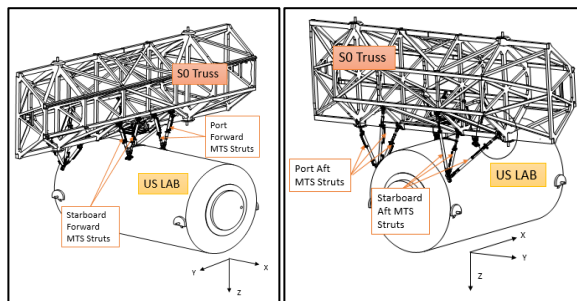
Schematic of MTS Struts Connecting S0 Truss to Lab
